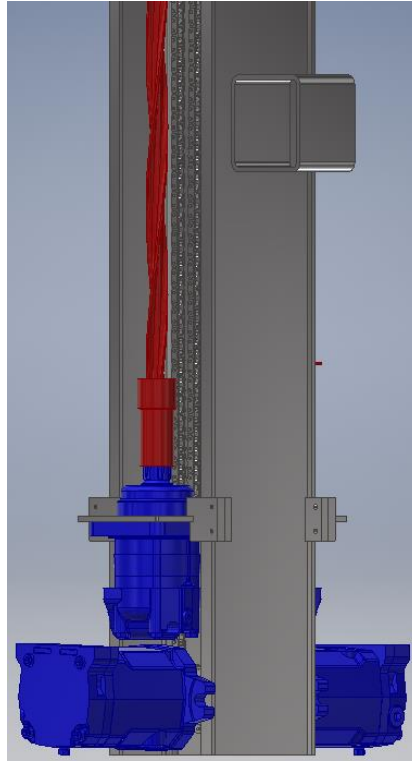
An image of the bolting/drilling apparatus. The blue hydraulic motor on the bottom left of the image is used to drive the chain and provide drilling thrust force. A mirror image of the setup is found on the other side, used for bolt installation and tightening.
